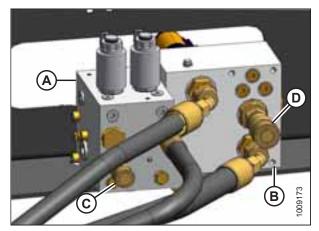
Manifolds without Reverser Valve Configured for Auger Header
